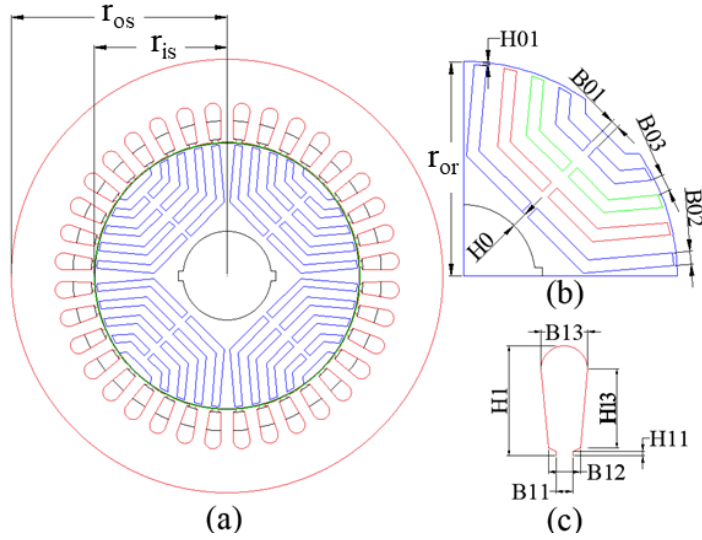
Machine geometry (a) 2D-layout of stator and rotor, (b) Rotor flux-barrier dimensions, (c) Stator slot dimensions.
